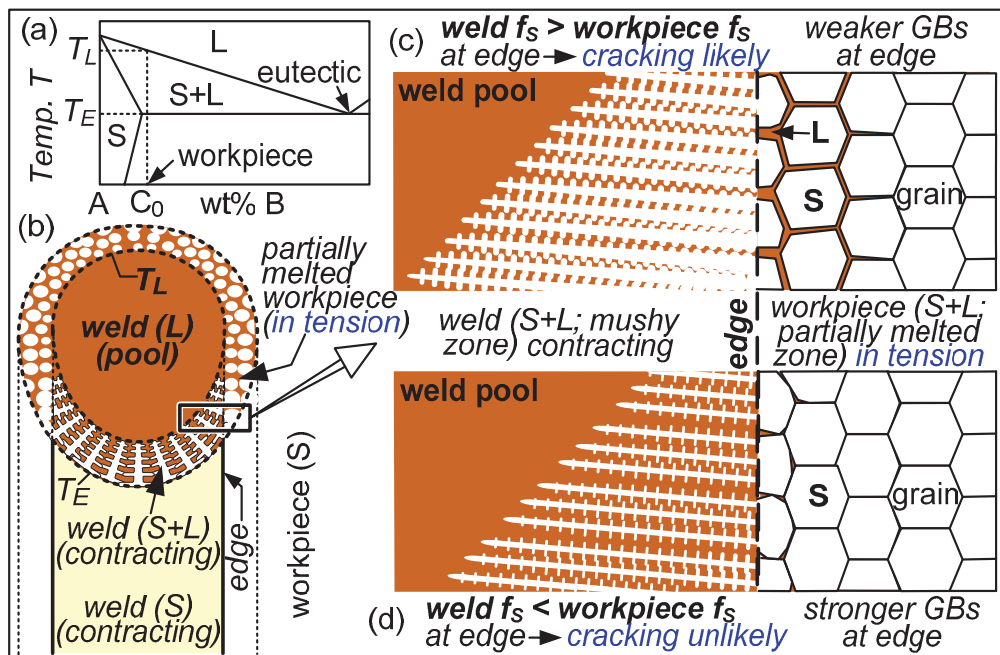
Susceptibility to cracking along weld edge: (a) phase diagram showing alloy  $C_0$  (workpiece); (b) microstructure around weld pool in welding of alloy  $C_0$ ; (c) cracking likely in welding an alloy; (d) cracking unlikely in welding another alloy with another filler wire.
